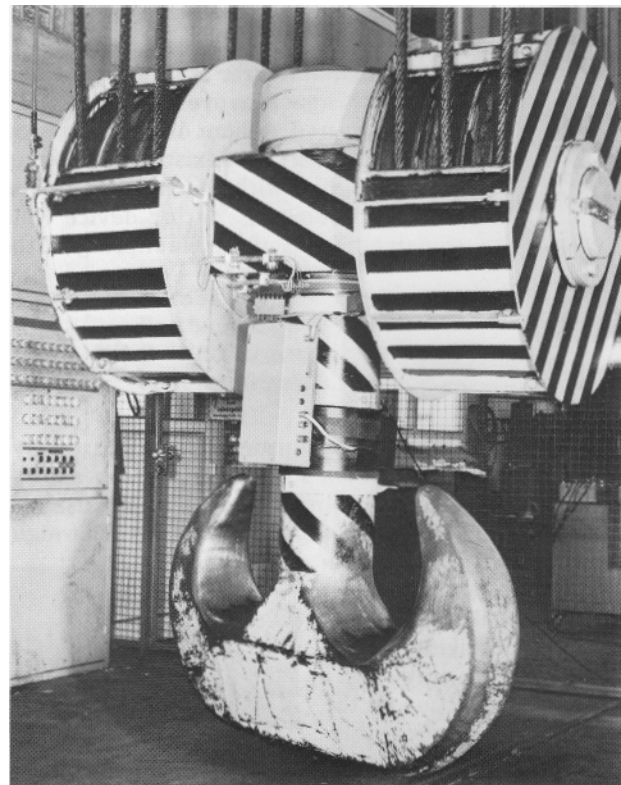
Attachment of amplifier to crane hook of 120-tonne (132-short-ton) capacity did not involve any drilling or welding of the load-bearing parts
